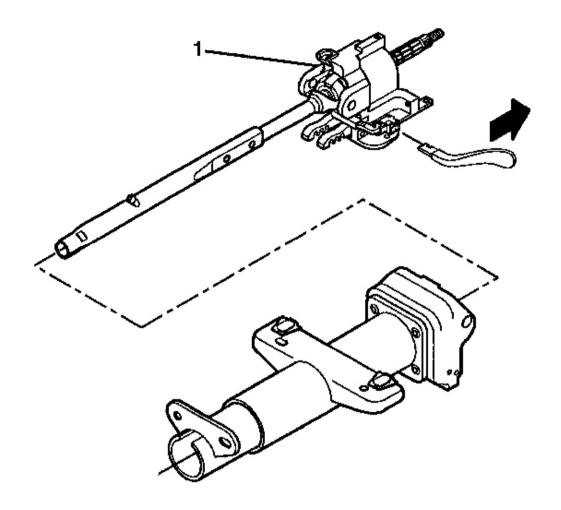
Steering Column Tilt Head Housing Assembly & Steering Column Lock Shoes Courtesy of GENERAL MOTORS CORP.
